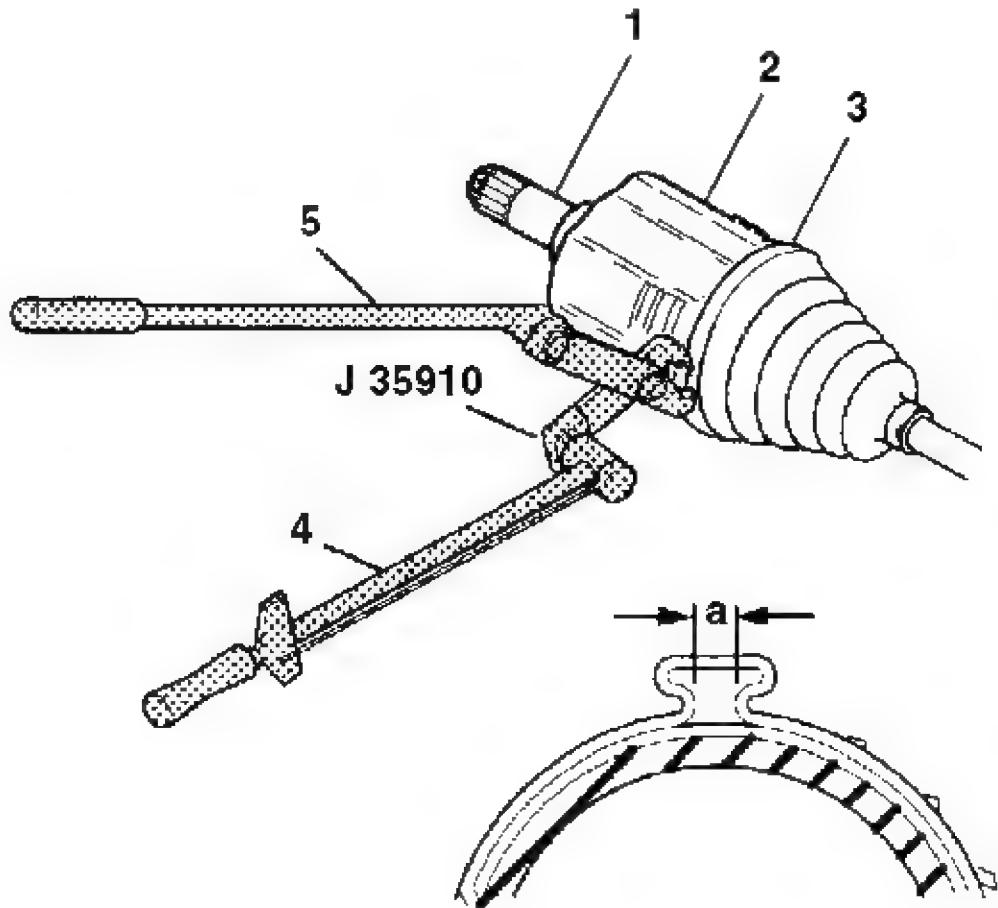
Adjusting CV Joint Boot Clamp Gap Dimension
